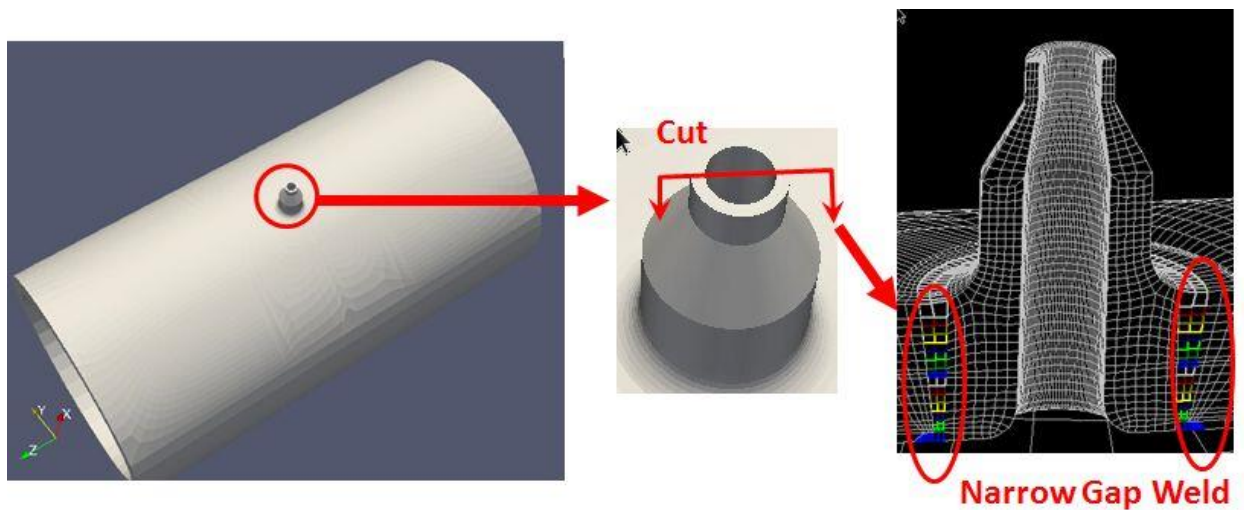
Head nozzle model (colors on right indicate weld passes)
